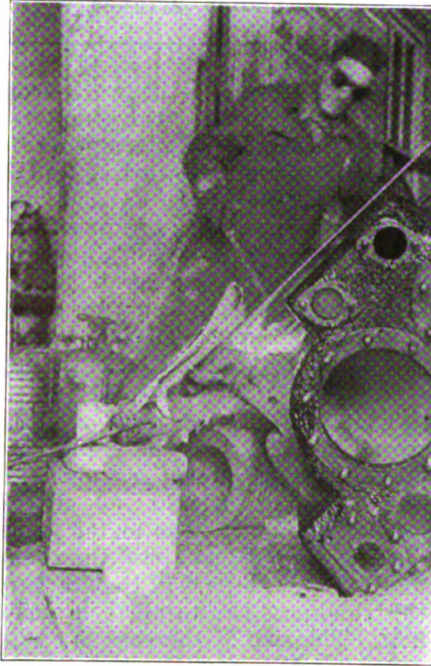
PREHEATING AND FIRST WELDING POSITION
